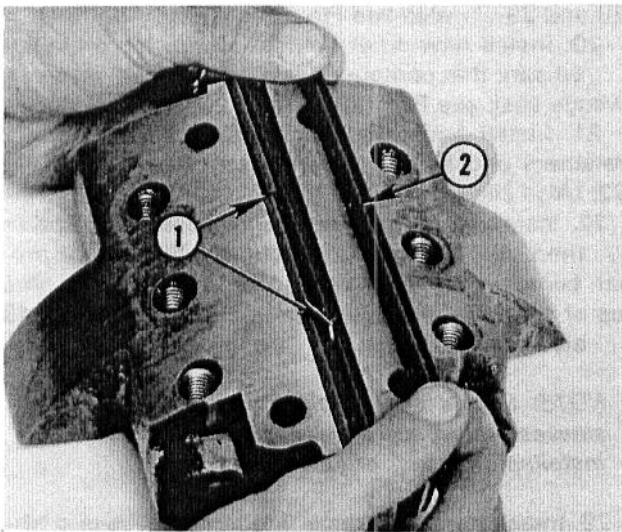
Removing/Installing Barrel Vane "Quad" Seal and Back-Up Washers
